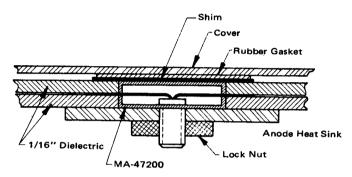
MA-47200 MOUNTING IN 1/8" BALANCED STRIPLINE
